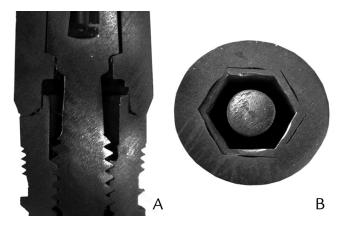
Sections of implant abutment assembly. A, Longitudinal section. B, Transverse section.
